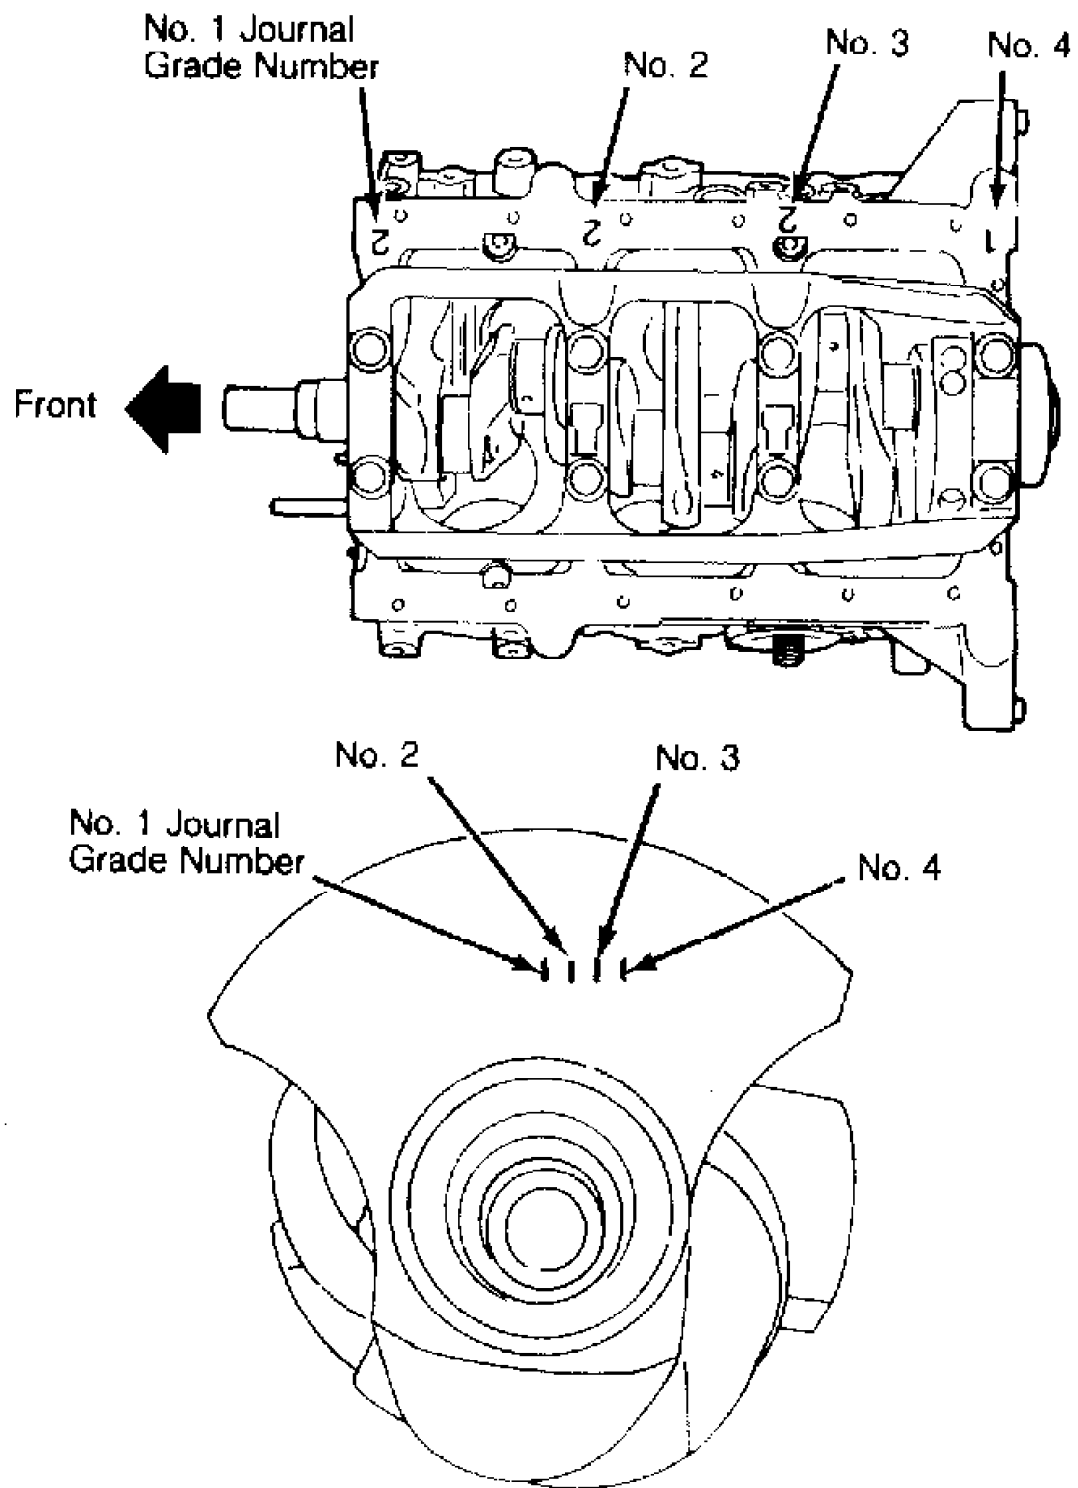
Identifying Cylinder Block & Crankshaft Code Numbers
